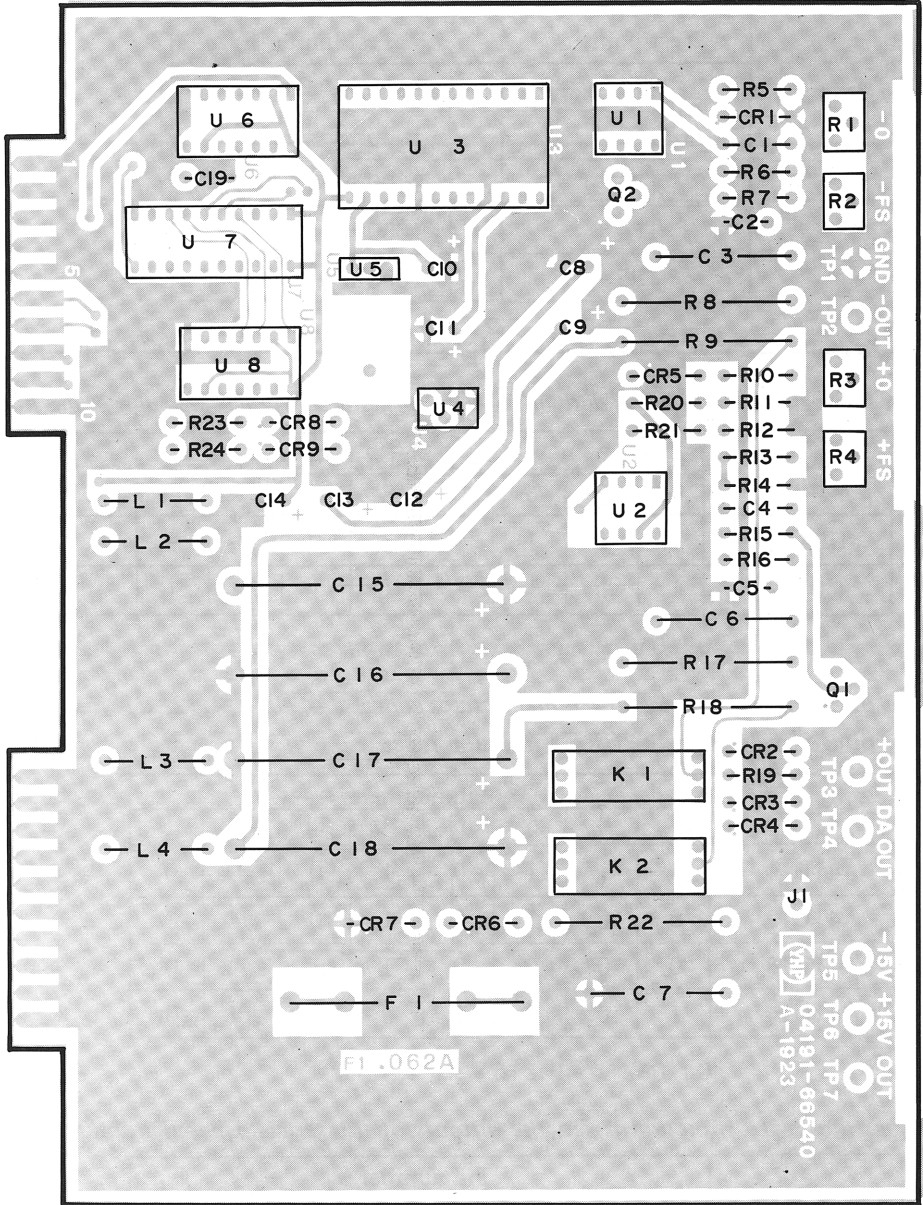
A40 DC Bias Supply Board Assembly Component Locations.
